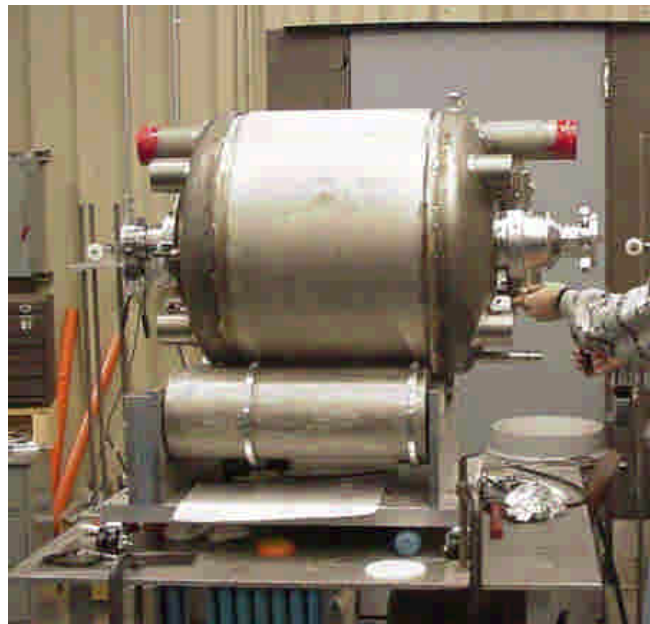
He vessel welding on the SNS  $\beta=0.61$  cavity [15]
